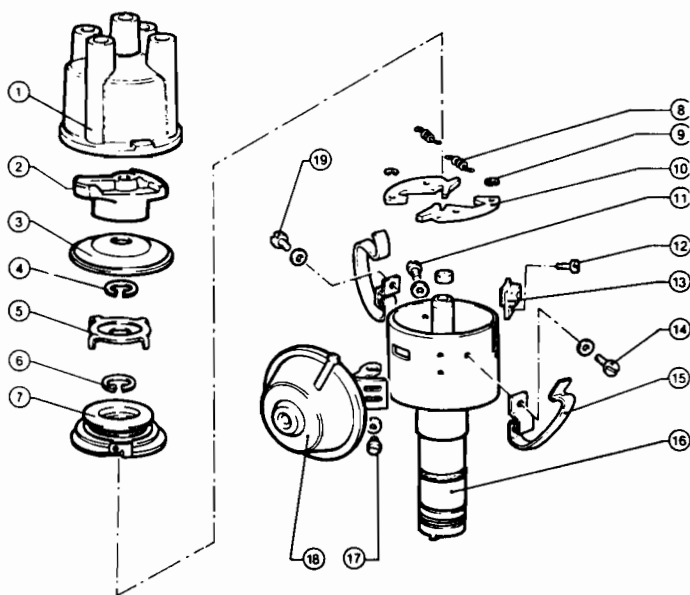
Exploded view of Bosch breakerless distributor (Sec 6)
